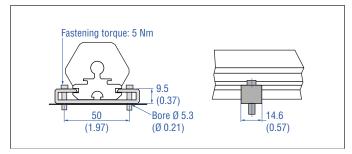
Mounting clamps (part no. 400 802) with cylinder screw M5×20
